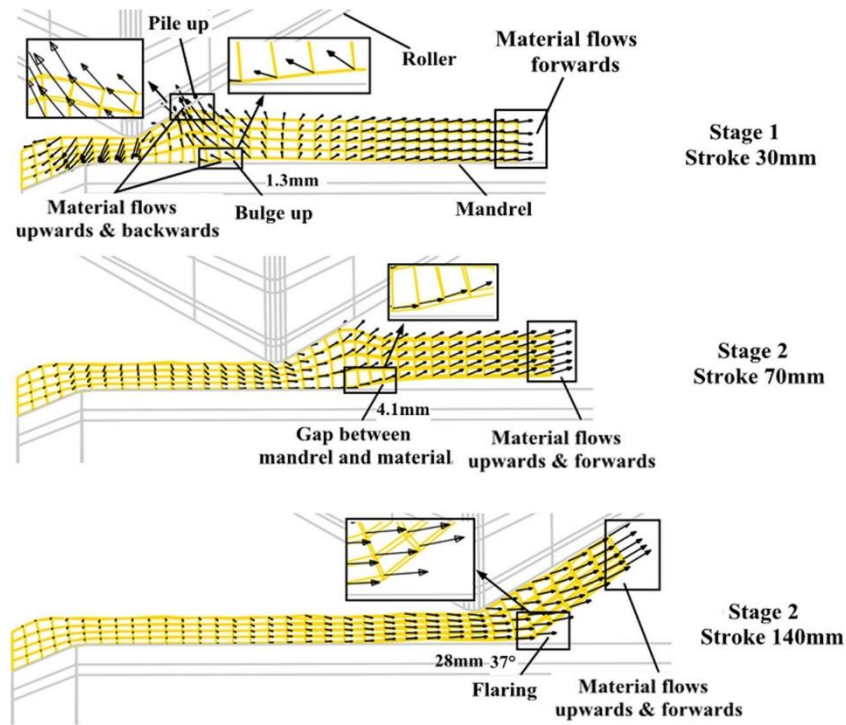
Formation mechanism of flaring in forward tube spinning process
